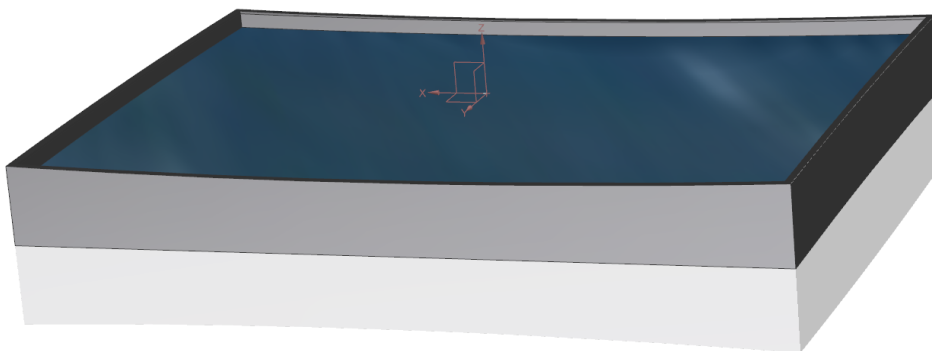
CAD model of the mold obtained using the Mirror Method for the flat plate under pure bending.
